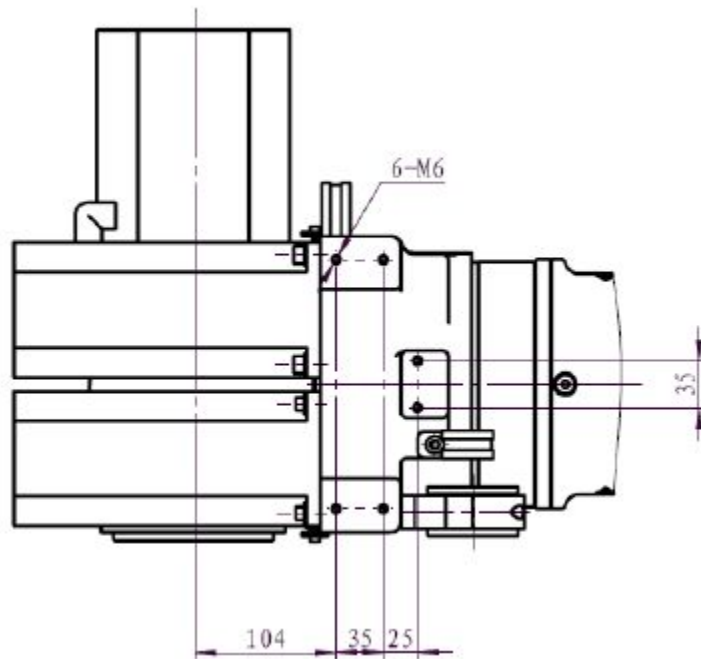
Forearm Auxiliary Mounting Hole Dimensions of SR25
